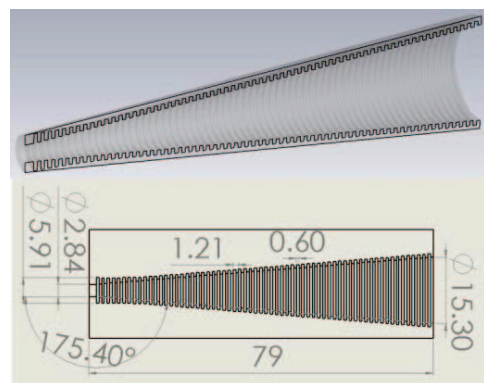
As simulated corrugated horn antenna cut in half and mechanical drawing with dimensions in millimeters.
